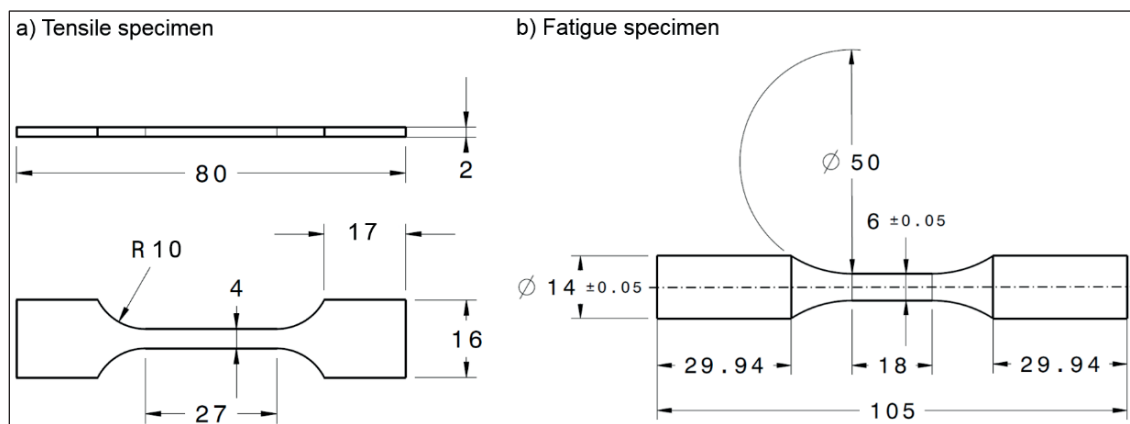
Printed specimens (dimensions in mm): (a) tensile and (b) fatigue specimens; all specimens were machined from the corresponding vertically printed blanks
